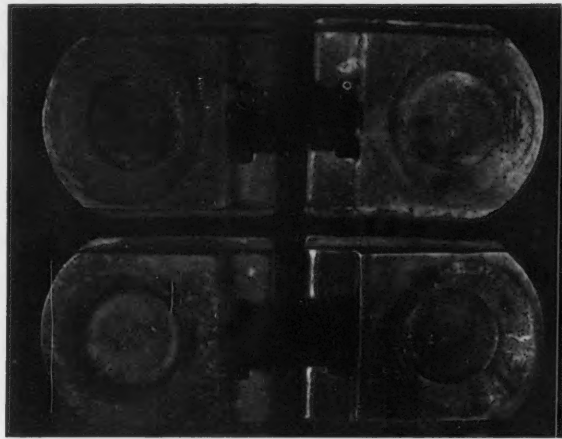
Corroded gates from Type 410 trimmed steel valves after acid cleaning. Corrosion on the sealing surfaces prevents complete shut-off.
